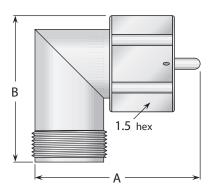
(Right angle plug-jack; connects one plug and one jack)
